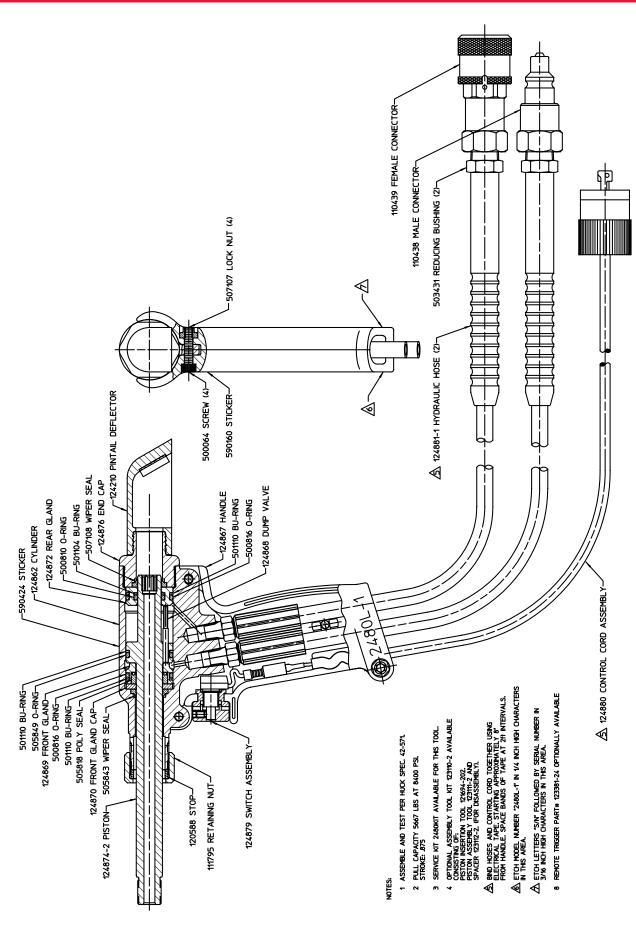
2480L-1 - Sectional View with Part Numbers
